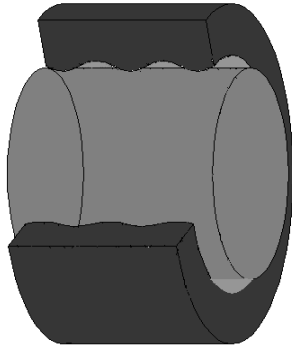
A-3D open view drawing of two circumferential grooves journal bearing.
